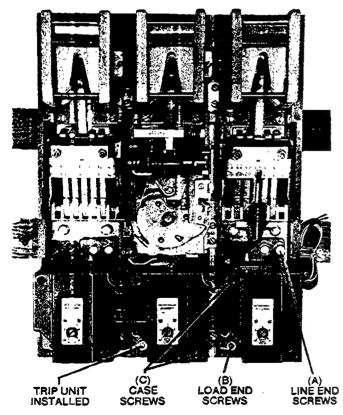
Breaker, with covers removed, showing trip unit installed.
